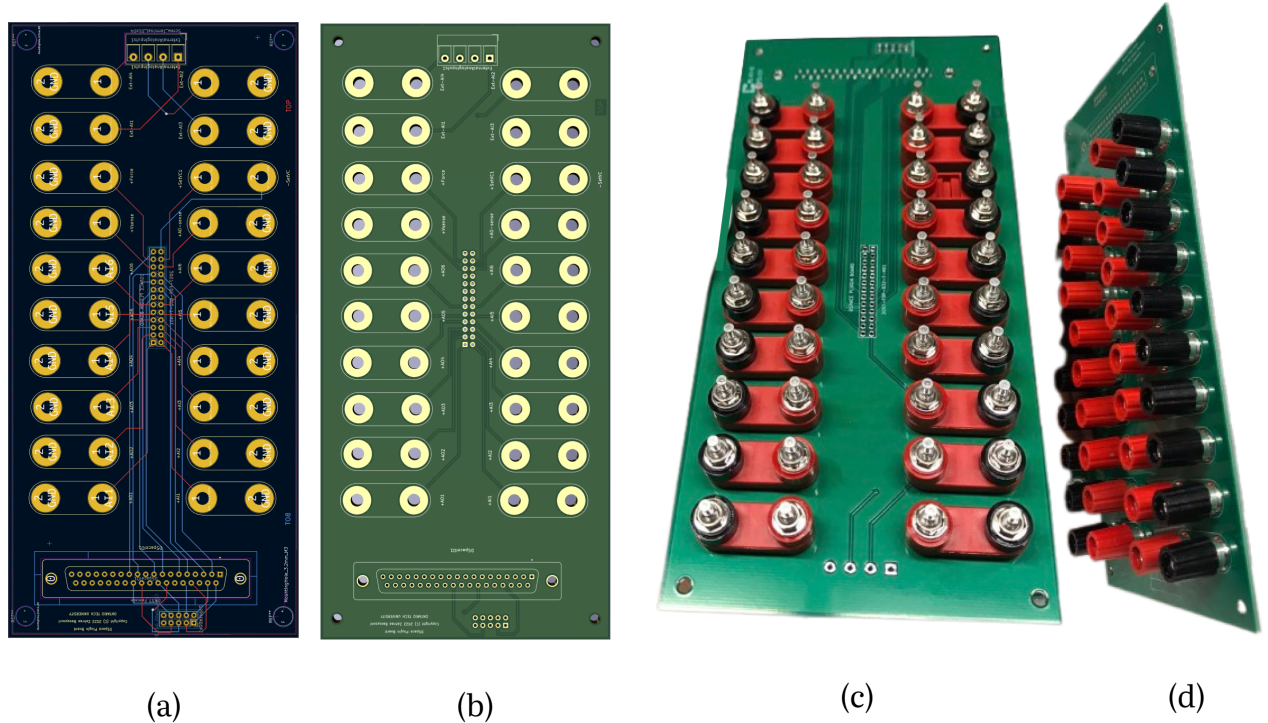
dSPACE Plugin Board. (a) Board Design on KiCad. (b) 3D View on KiCad. (c) Front and (d) Back of PCB with soldered component.
